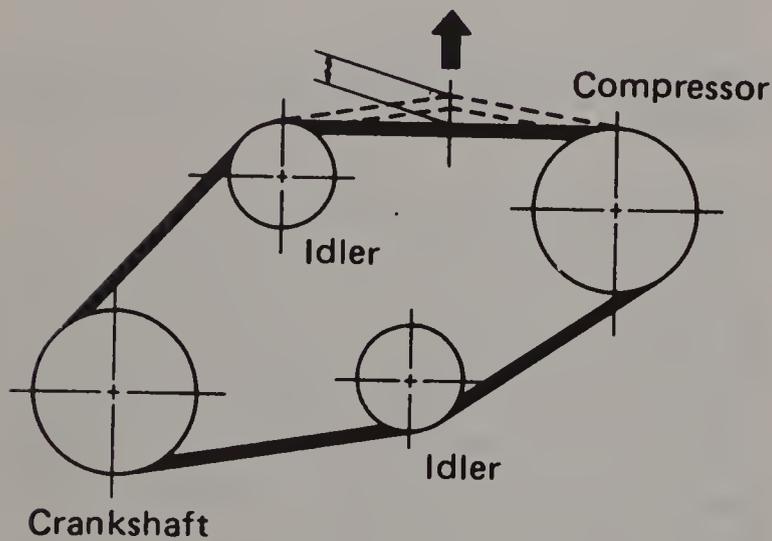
Air conditioning compressor drivebelt tension check (Sec 11)
